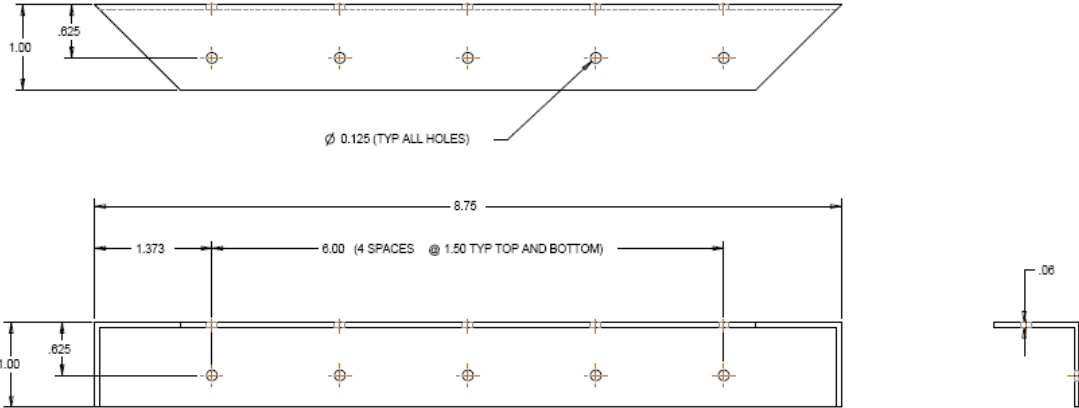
Dimensioned drawing of modified spin coater cover long corner brackets
